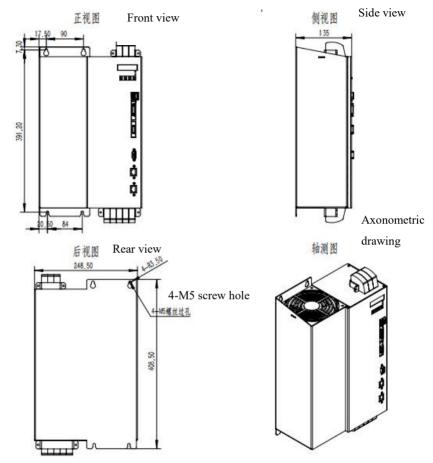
25A/50A/75A appearance dimension diagram
